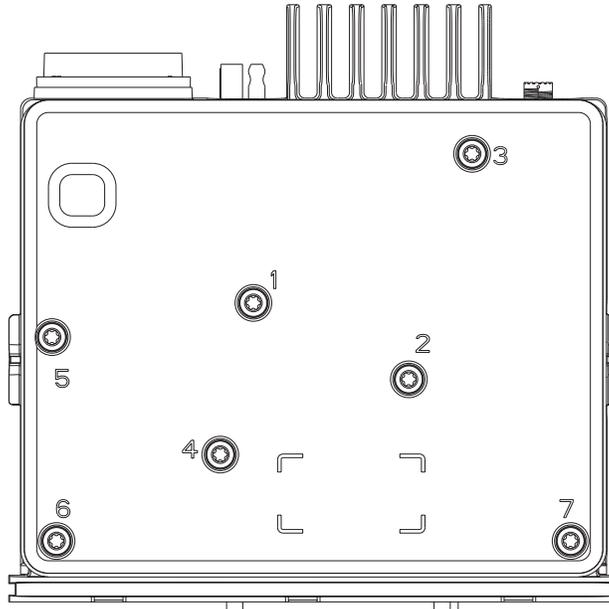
Screw Sequence to Tighten Die Cast Cover
